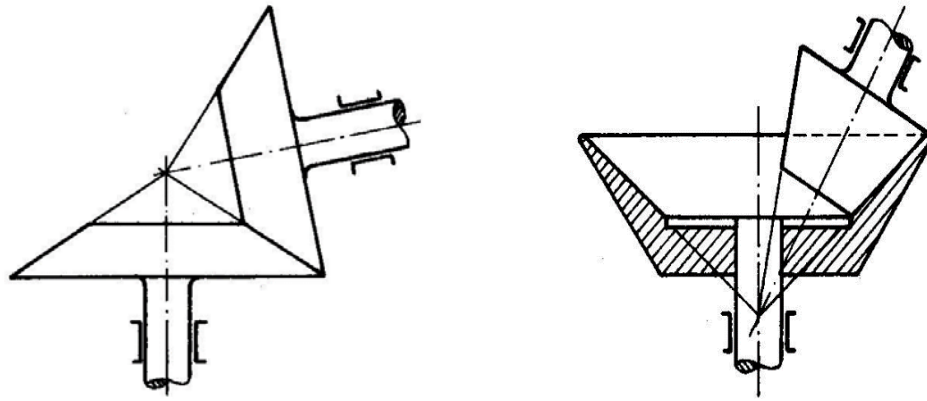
EXTERNAL (LEFT) AND INTERNAL (RIGHT) BEVEL GEARS
